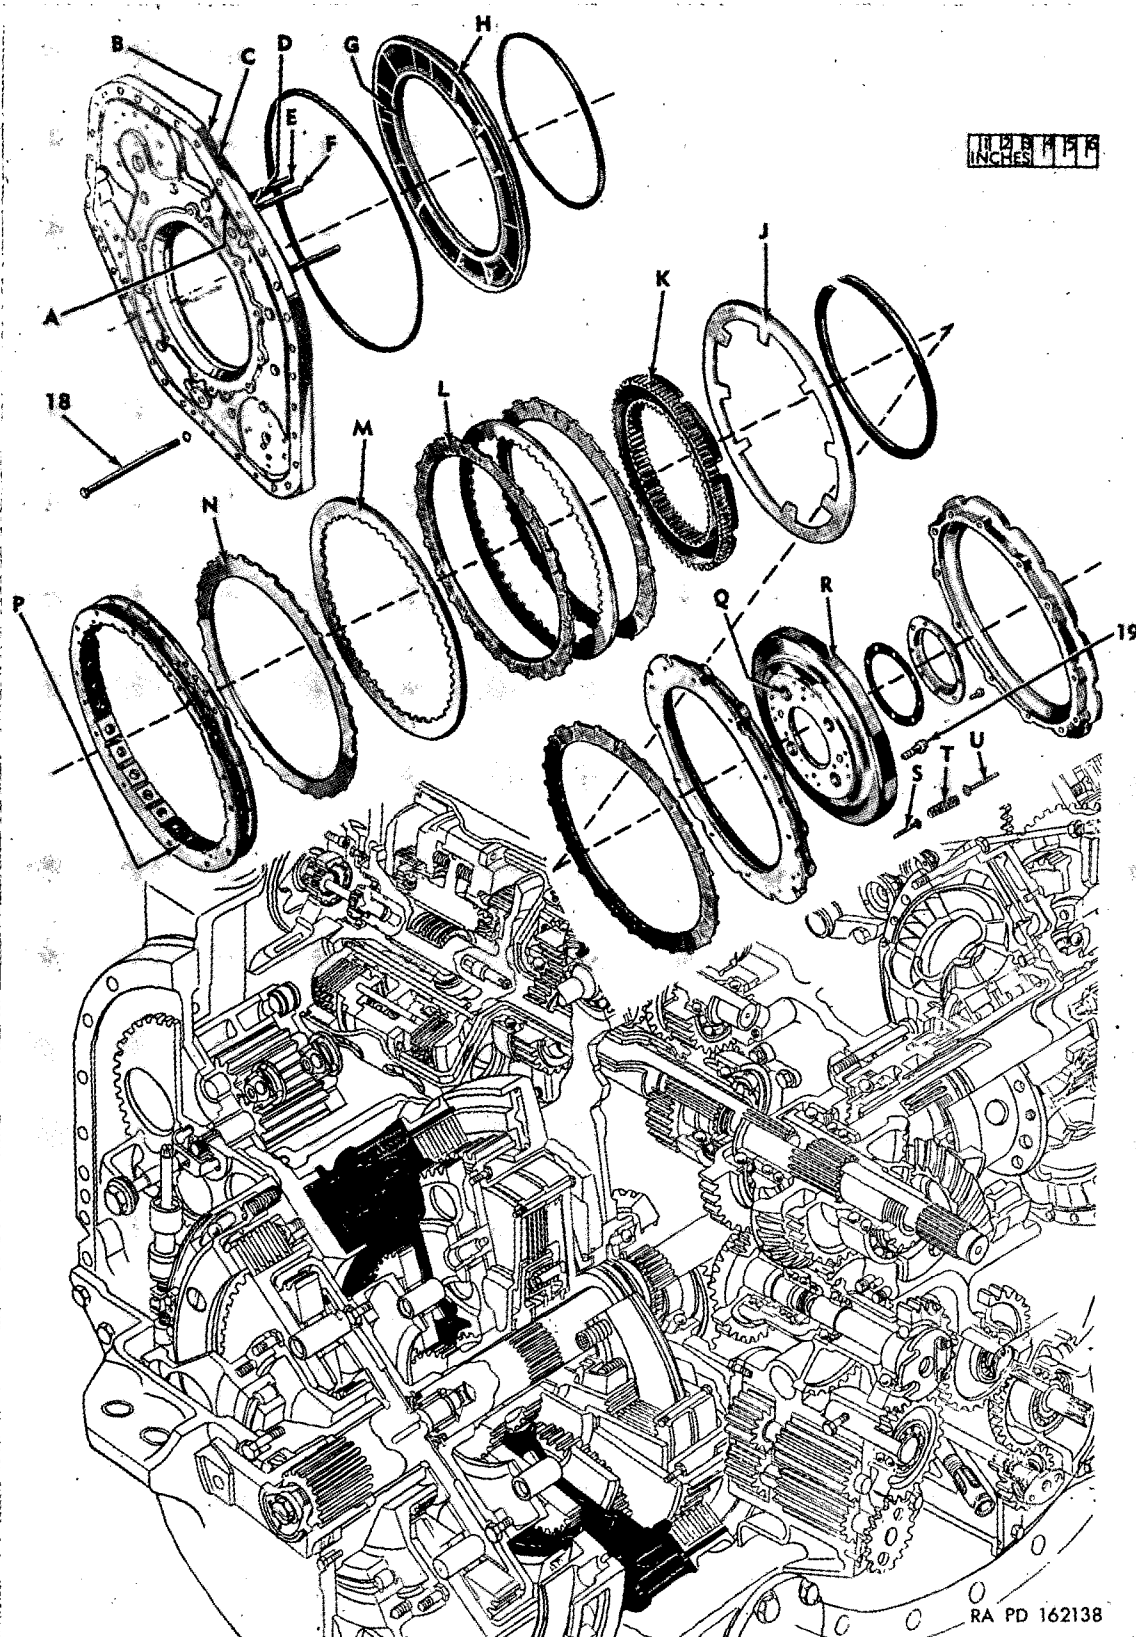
Serviceability standard points of measurement for right end plate and drive clutch package unit.
